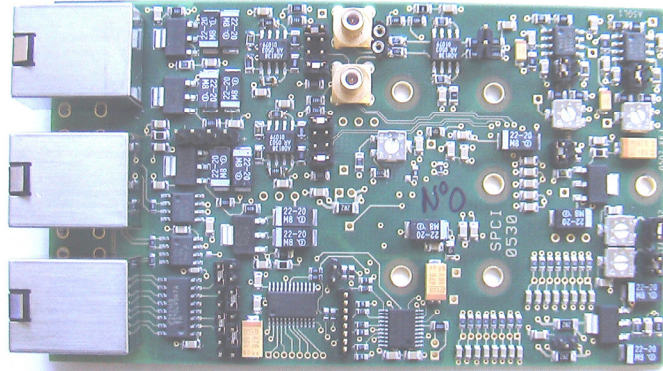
the MIMOSTAR2 prototype test PCB (MIMOSTAR_PCB2).
